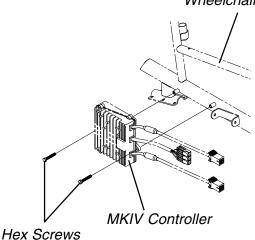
REMOVING/INSTALLING MKIV CONTROLLER
